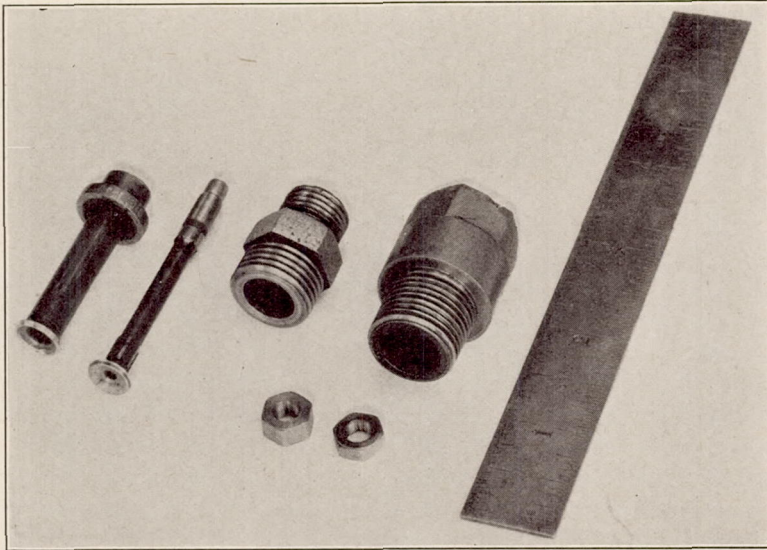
Annular orifice automatic injection valve disassembled showing size, simplicity, and small number of parts
